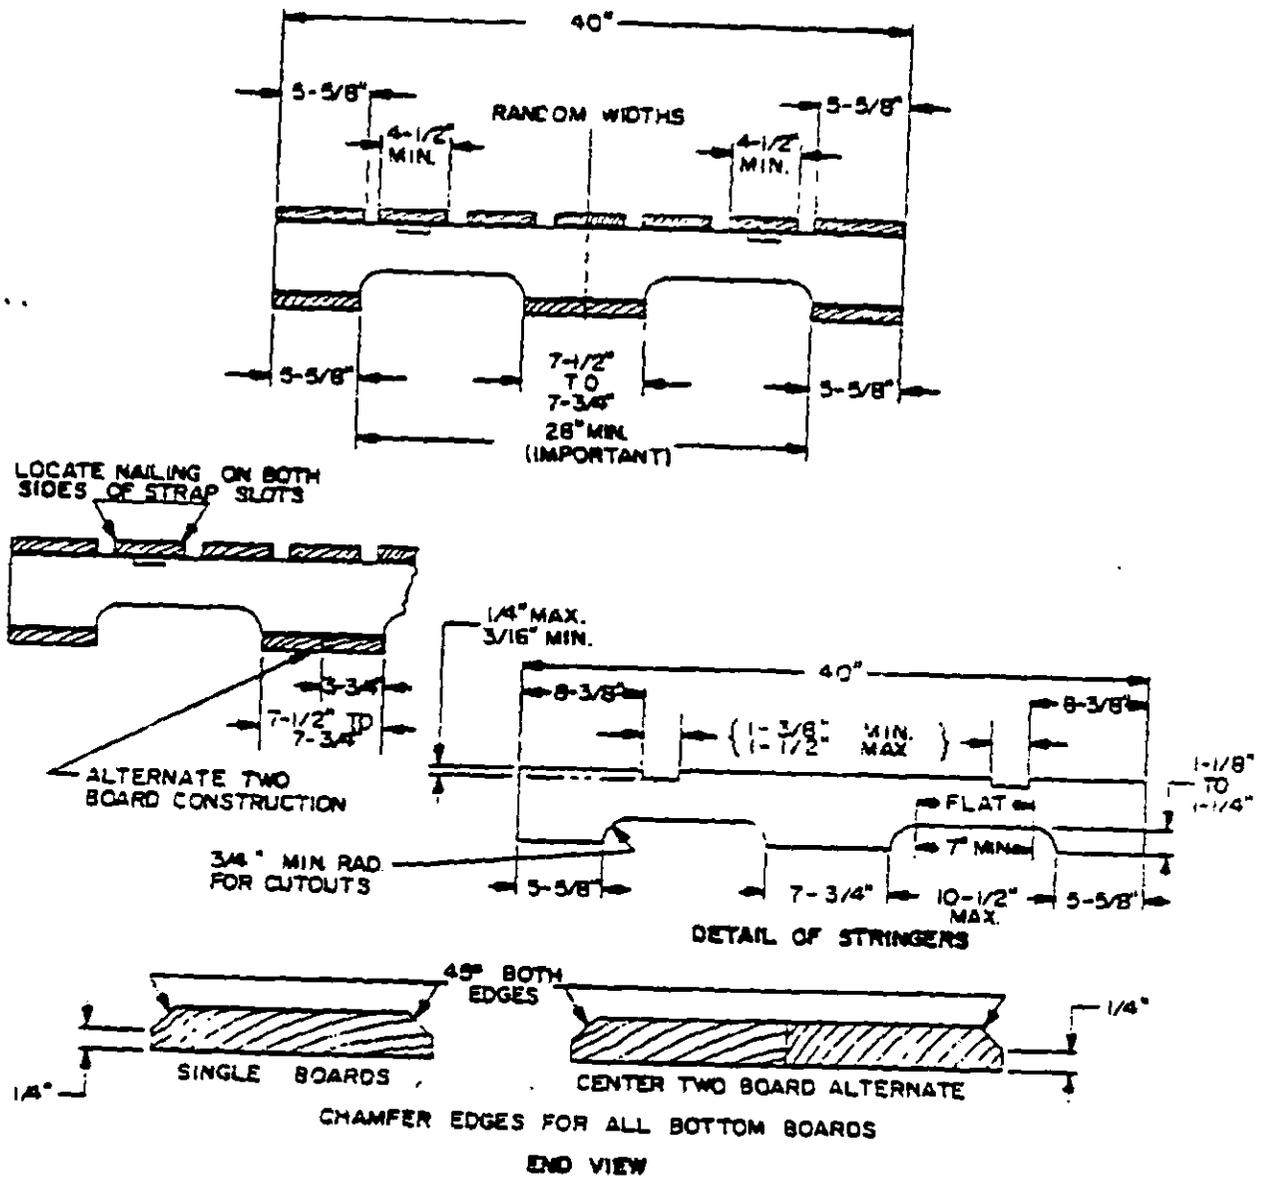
DETAIL OF PALLET COMPONENTS TYPE V, SIZE 2 (DIMENSIONS SHOWN FOR GROUP III & IV WOODS). (ALSO APPLIES TO TYPE IV PALLETS)
